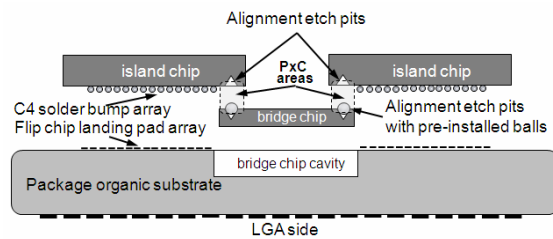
Cross-sectional schematic view of the components comprising PxC package.
